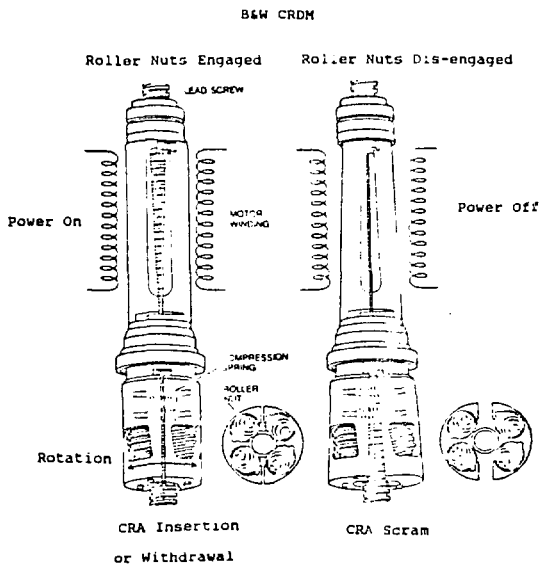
B&W CRDM Rotor Assembly and Leadscrew
